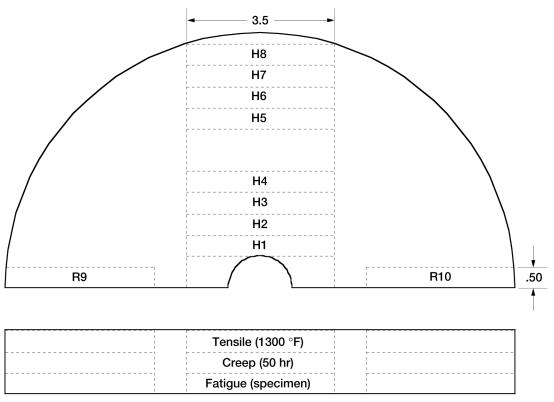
Cut up plan for tensile testing. Only half the forging was used.
